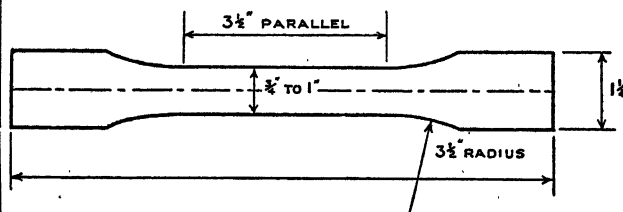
Specimen for Tensile Strength and Extension Tests.
